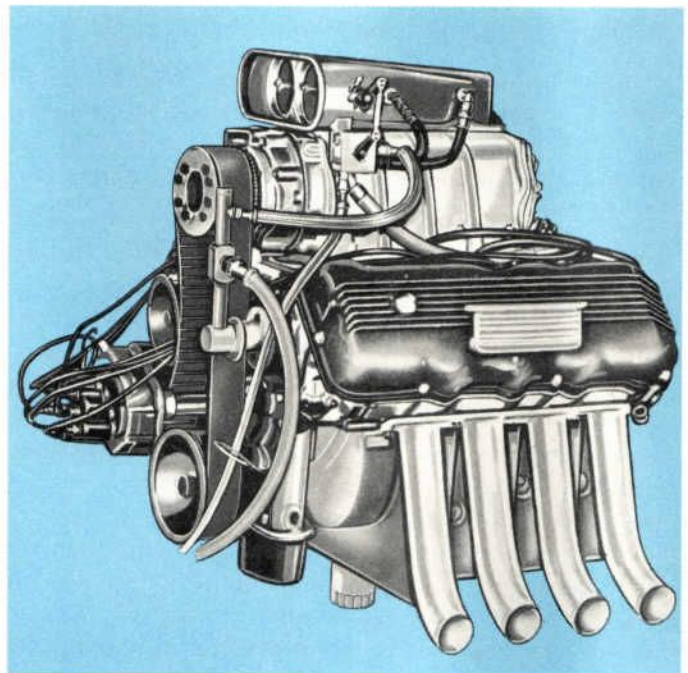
TYPICAL SUPERCHARGER INSTALLATION
